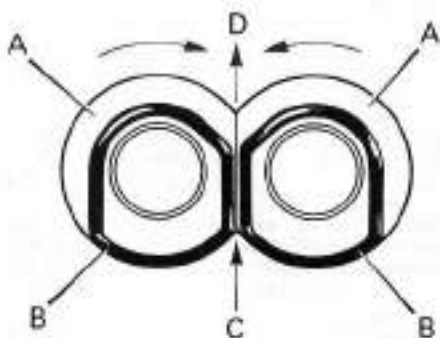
"O" ring (B) installation on late Dowty pressure balanced bearings. Bearings must be installed with pressure area (A) to outlet (D) side of pump. Inlet side of pump is (C).
